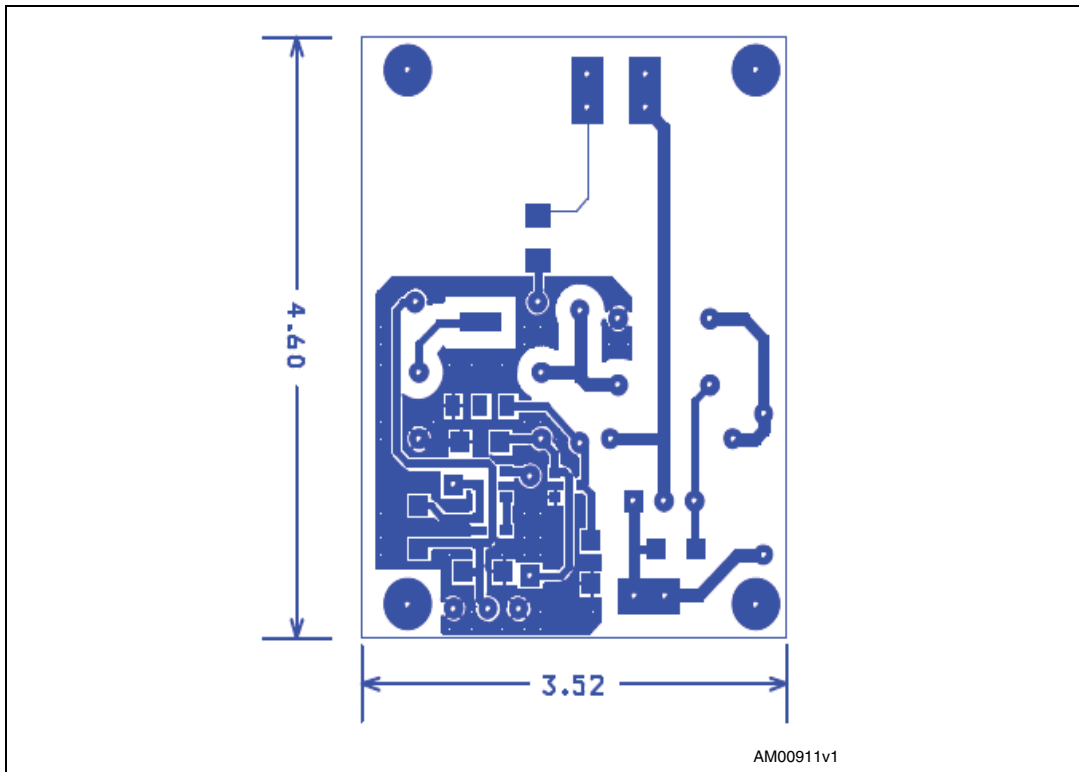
e-STARTER copper side (bottom view, dimensions in cm)
